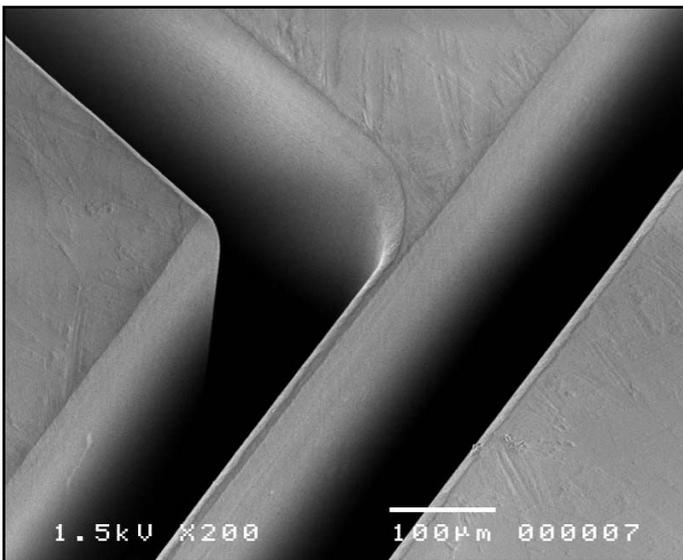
Machined Micro Components With AlCrN Coated Cutting Tool [5]
